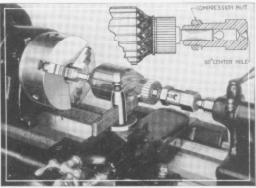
A Centerless Armature Mounted in the Lathe with a Special Centering Collet
